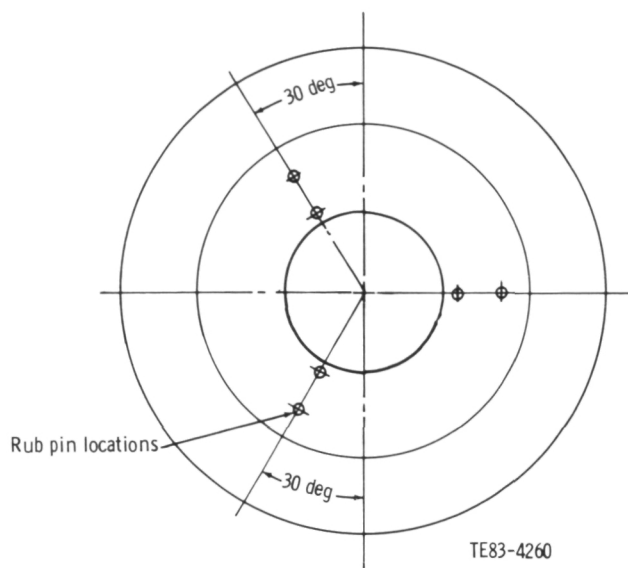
Gasifier turbine rotor shroud rub pad locations.
